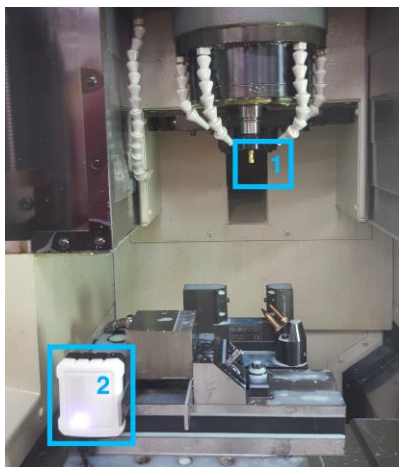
A MORI SEIKI NVD1500DCG MILLING MACHINE WITH CUTTING TOOL (1) AND SENSOR UNIT FROM INFINITE UPTIME (2)
